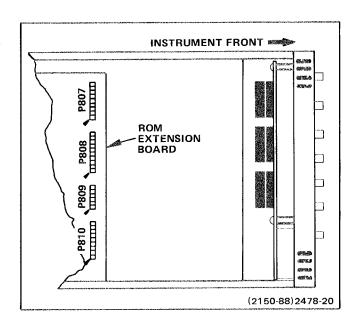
Partial view of ROM Extension board. Shows pin location and indexing for connection to the Interface Test Fixture.
